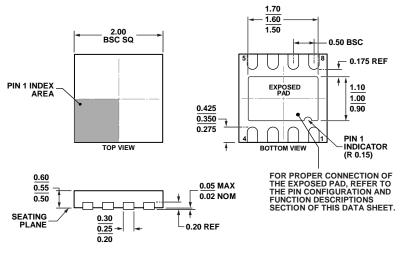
8-Lead Frame Chip Scale Package [LFCSP_UD] 2 mm × 2 mm Body, Very Thin, Dual Lead (CP-8-10) Dimensions shown in millimeters
